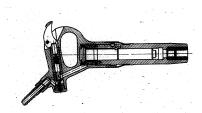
Sectional view of the P5 Chipping and Calking Hammers
